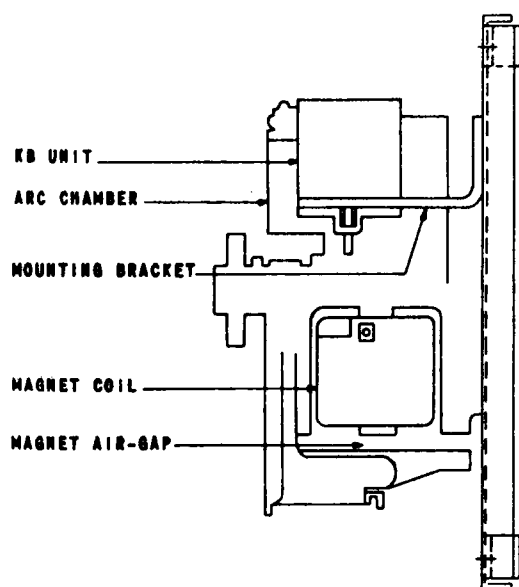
END VIEW OF KS-5626 CONTACTOR
